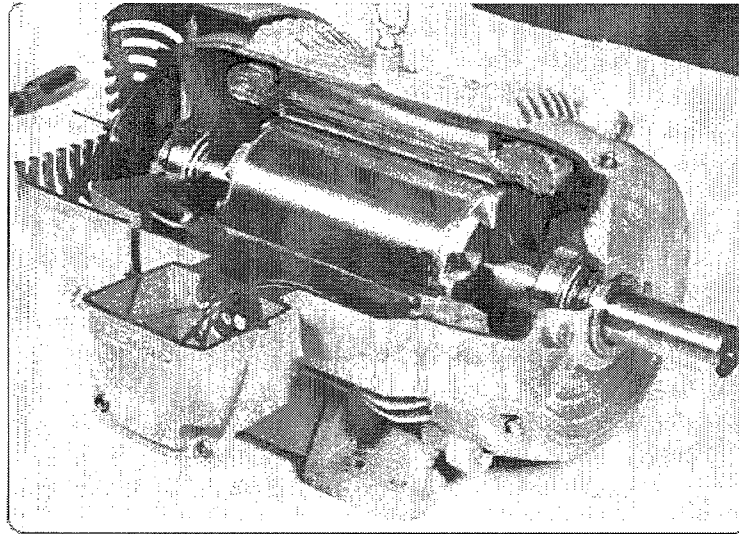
Sectional View of Siemens Copper-Rotor Motor. (Picture courtesy Siemens)
